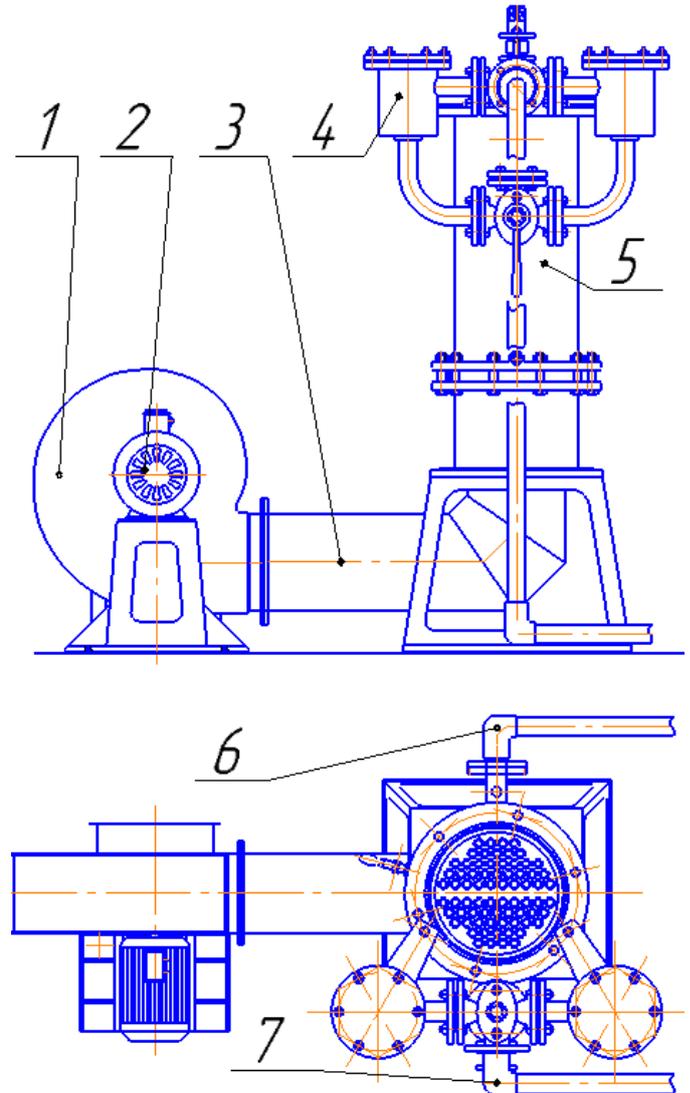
Air cooling system of the oil system of the pump unit: 1- blower; 2 – blower driver; 3 – air piping; 4 – oil filter; 5 – oil cooler; 6 – oil pipeline (exit); 7 – oil pipeline (entrance)
